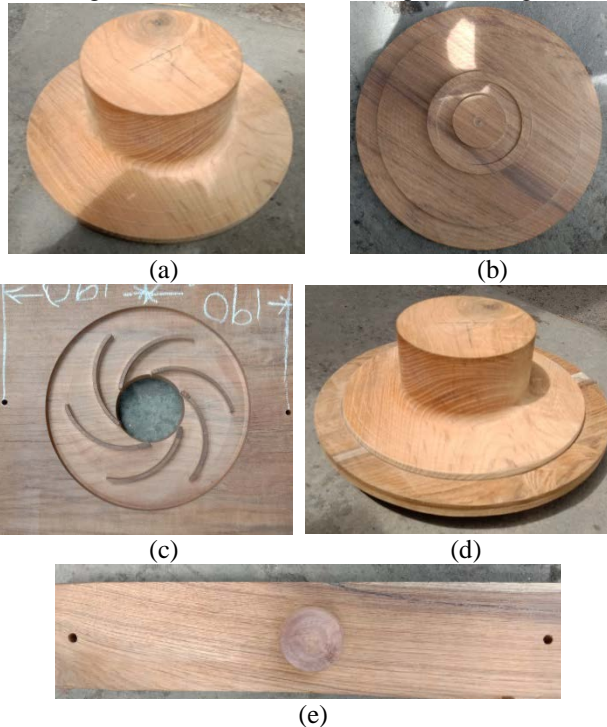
Machined Pattern of Impeller Design (a) Pattern for Front Impeller Shroud (b) Pattern for Impeller Back Shroud (c) Pattern for Impeller Eye and Blades (d) Assembly Pattern for Front and Back Impeller Shrouds and (e) Pattern for Impeller Shaft
